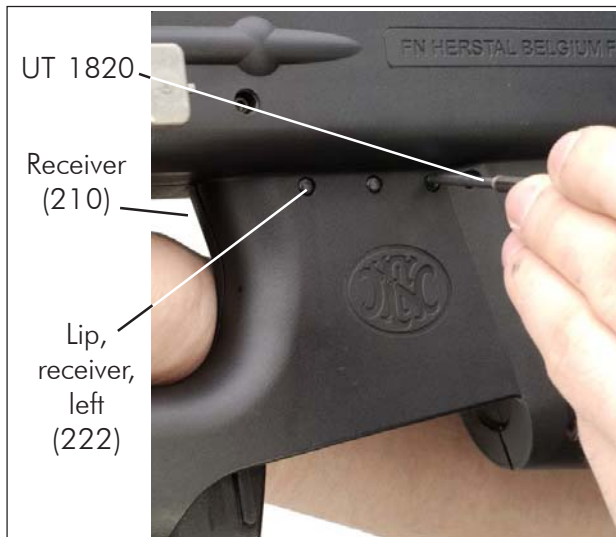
ad - Removal of the lip, receiver, left (222)/right (223)
